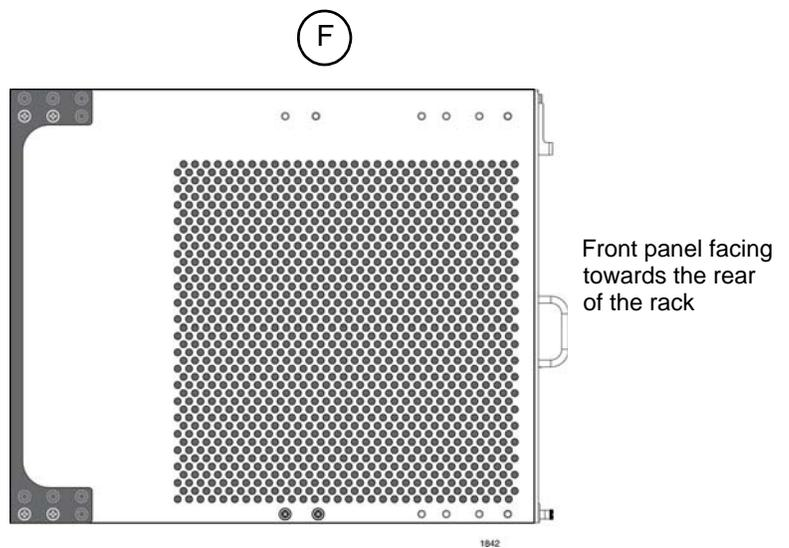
Rack Bracket Locations for Reverse Position of Chassis
